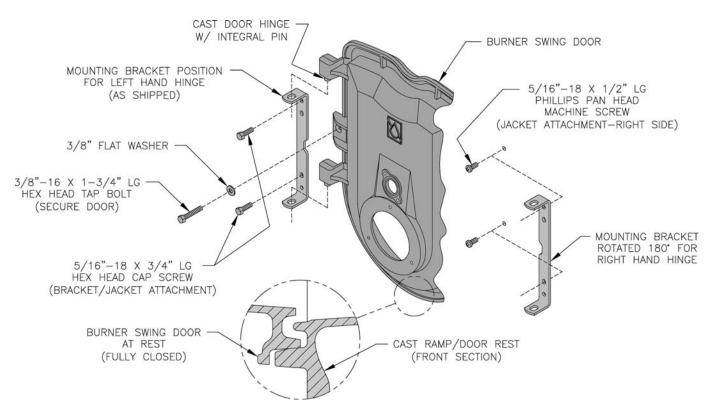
A: Partial Front View - Burner Swing Door Mounted to Boiler - Fully Closed and Secured
